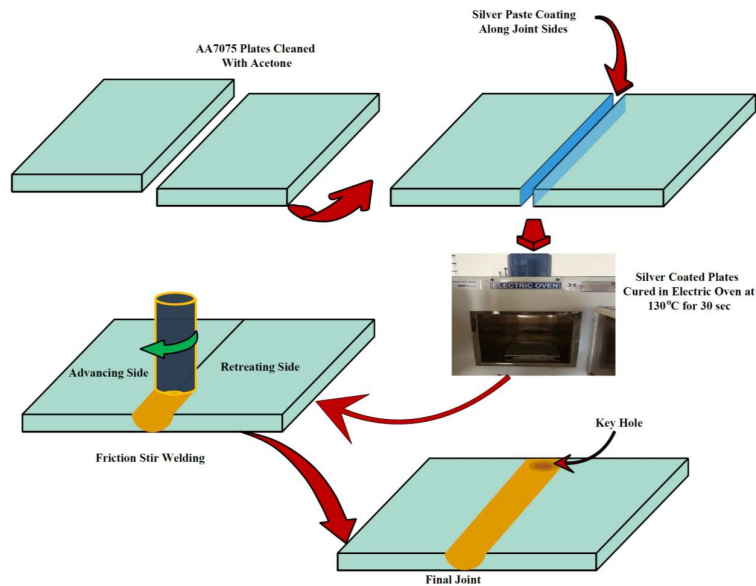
Schematic of friction stir welding process of silver-coated AA7075-T6 plates.
